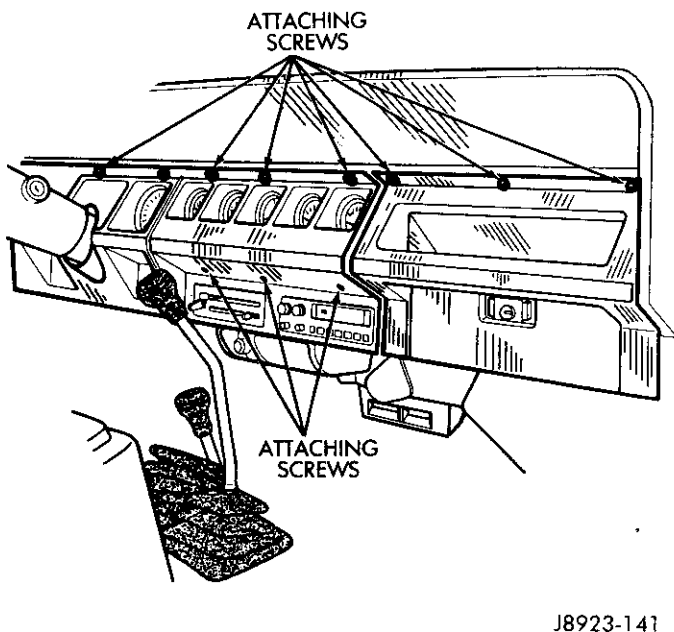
Bezel Attaching Screws (Upper and Lower)
